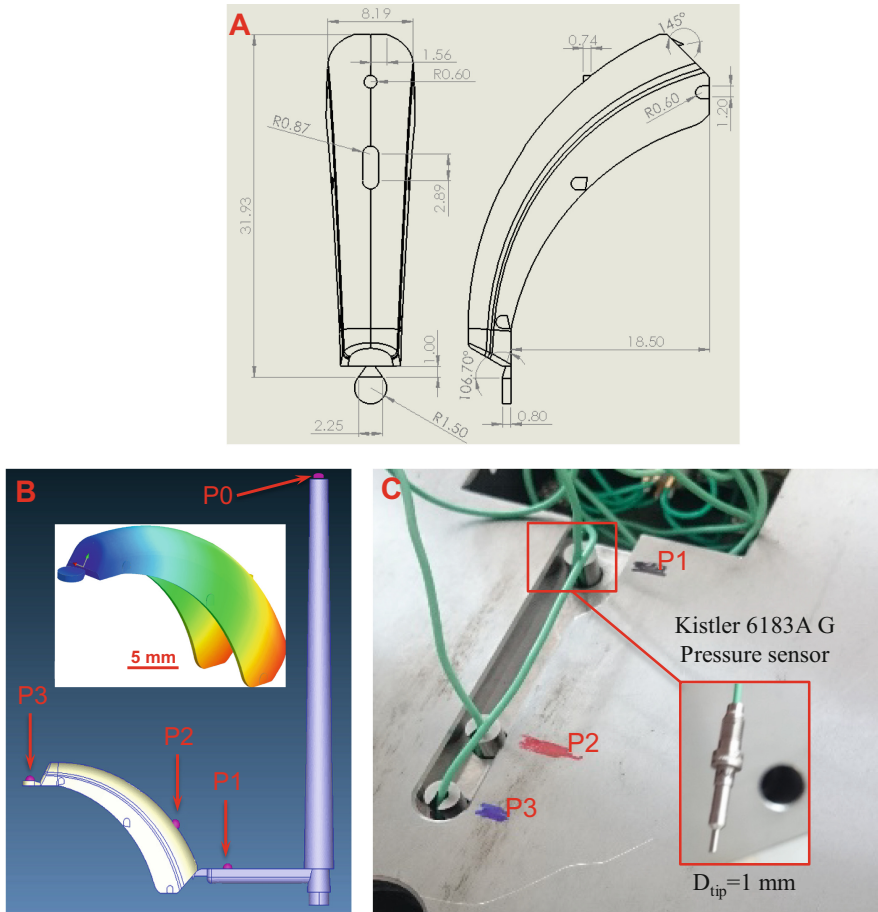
Drawing of the hearing aid shell (A); simulated and CAD model of the shell (B) - CAD model showing the position of the sensors; assembly of the sensor in the mould (C).
